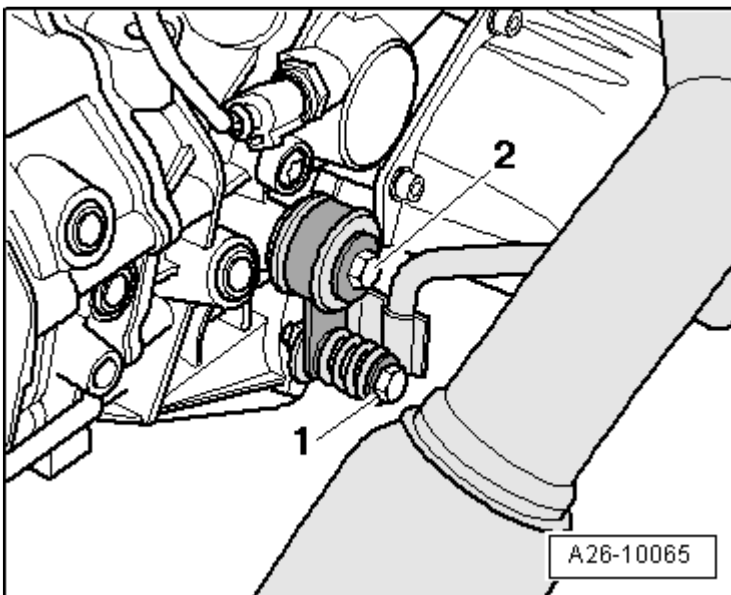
Removing Bolt At Right Bracket For Front Exhaust Pipe
